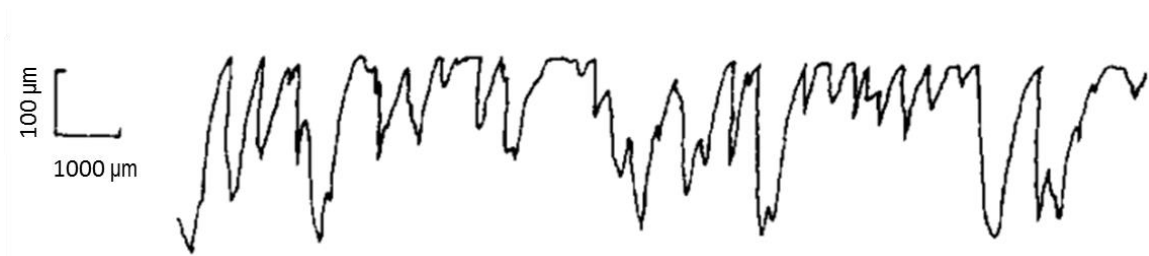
Typical two-dimensional stylus measurement of 46 grit grinding wheel [26]
